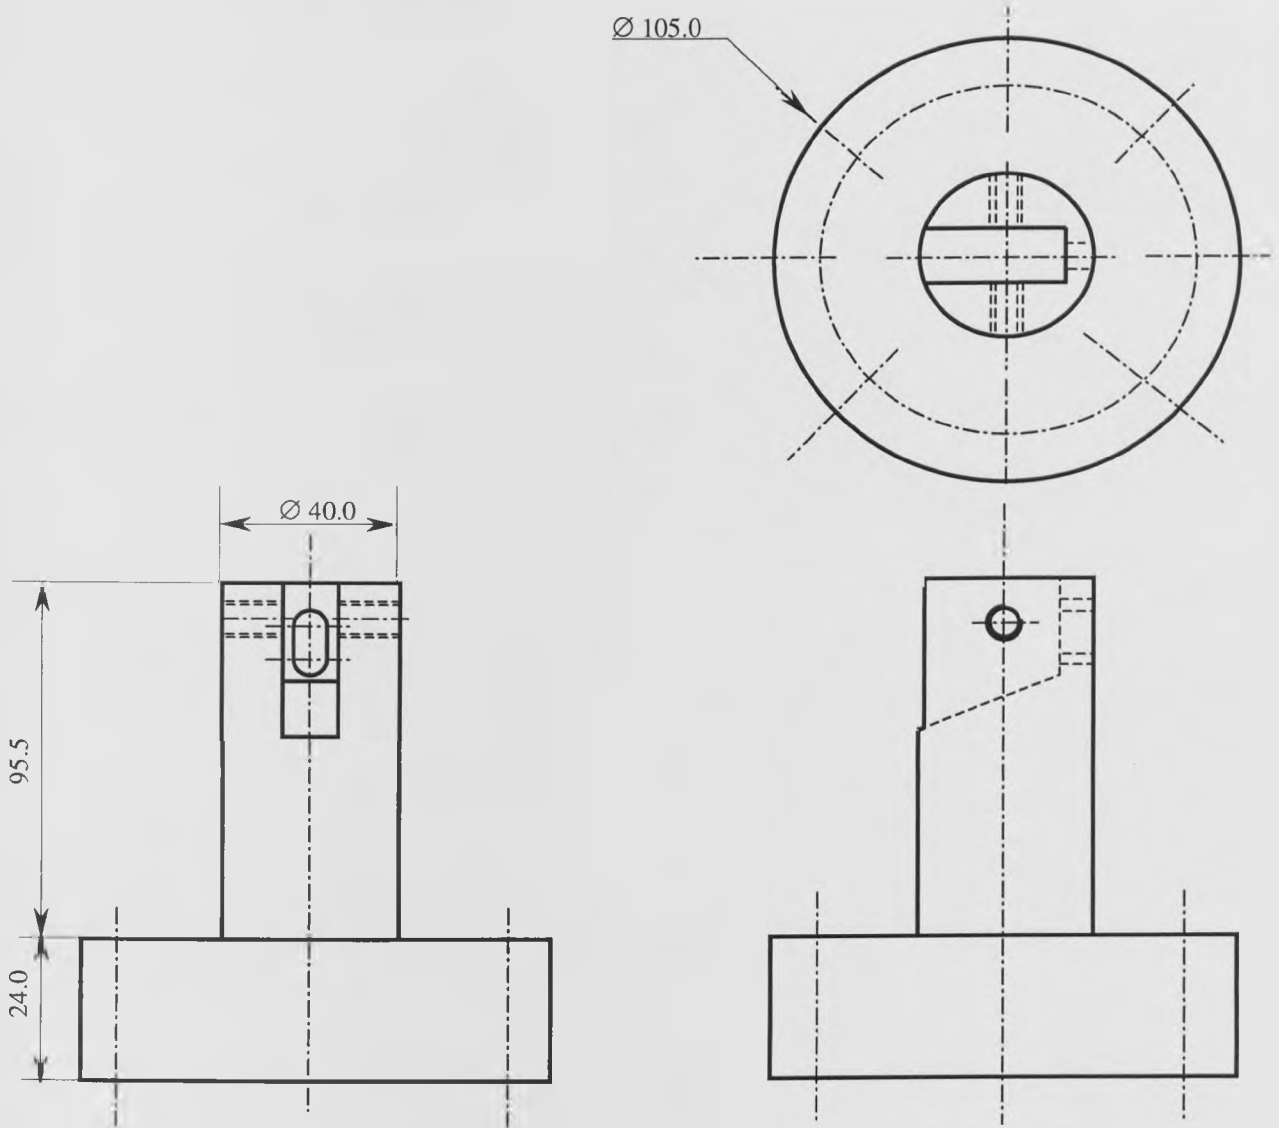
B: Lower grip dimension (unit in mm; dimension at the head is the same as the lower grip dimension)
